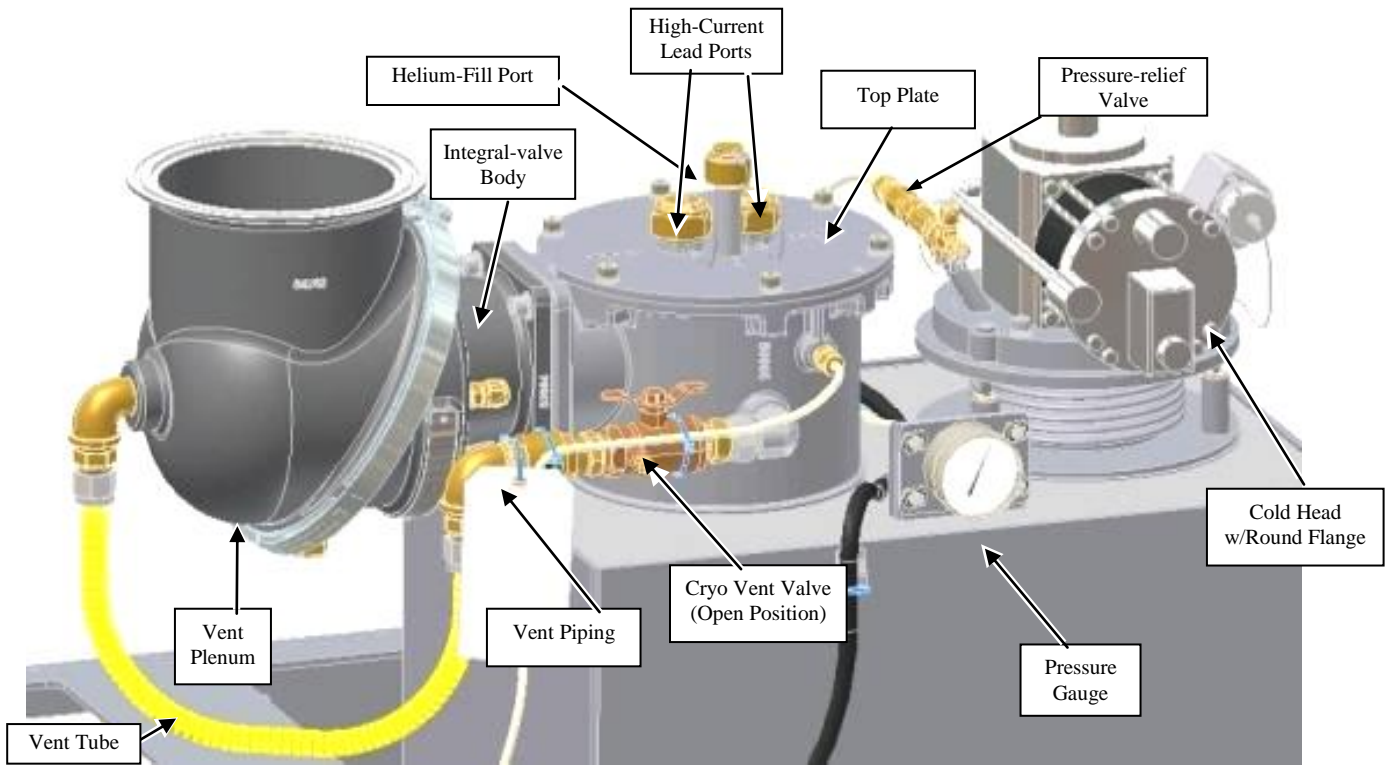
Rex Magnet Top Assembly w/Newer-Model (dynamic) Integral Valve
